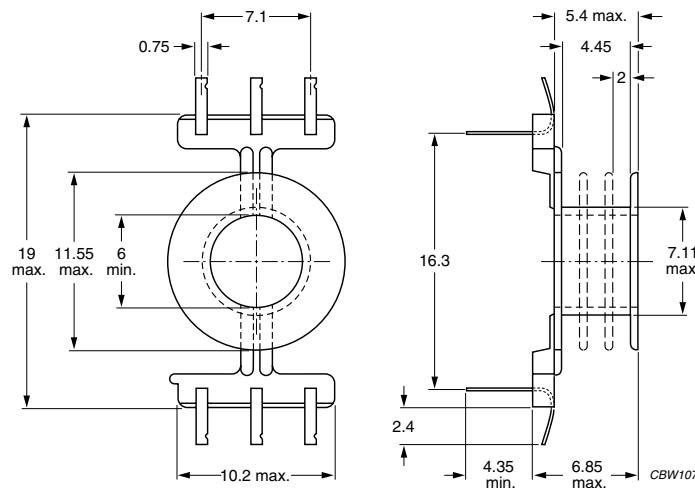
P14/8 coil former for PCB mounting; 4-pins.
